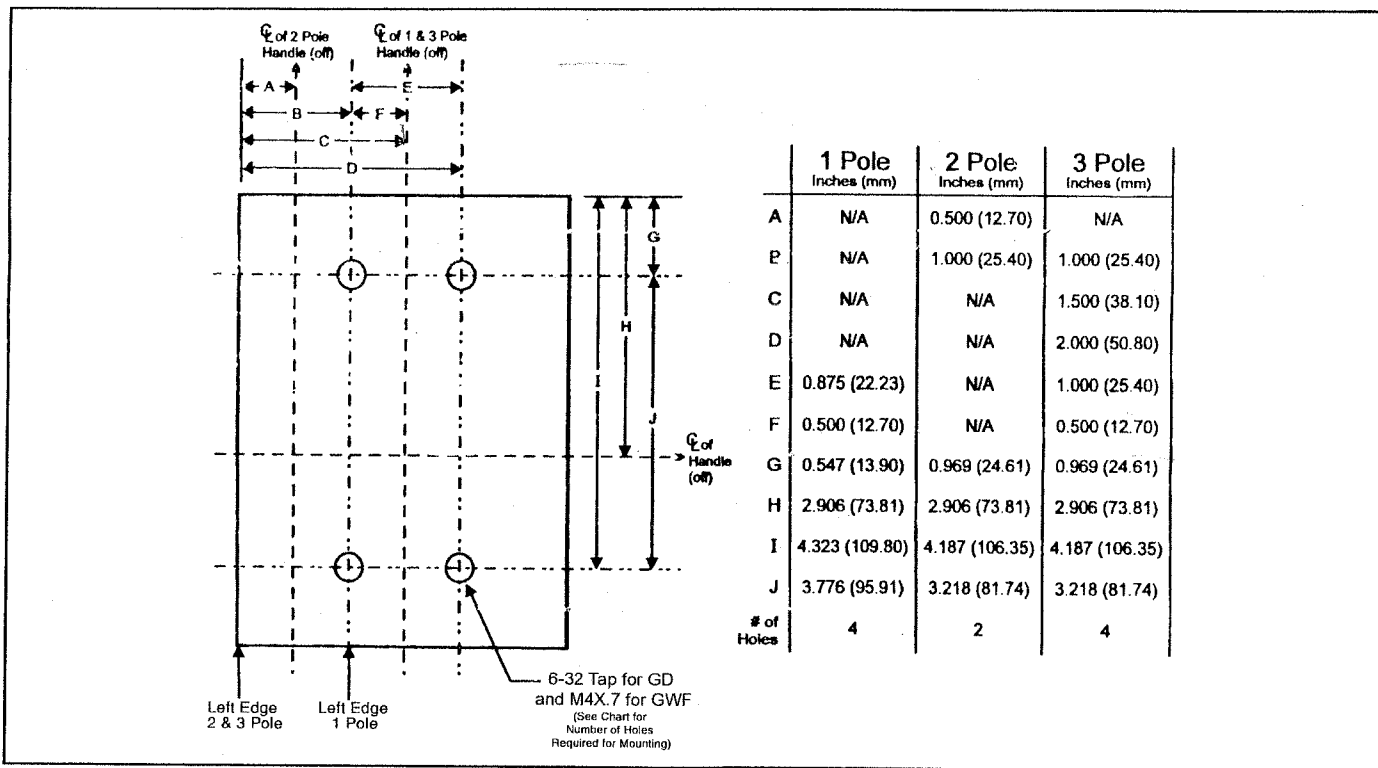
Circuit Breaker Mounting Bolt Drilling Plan
